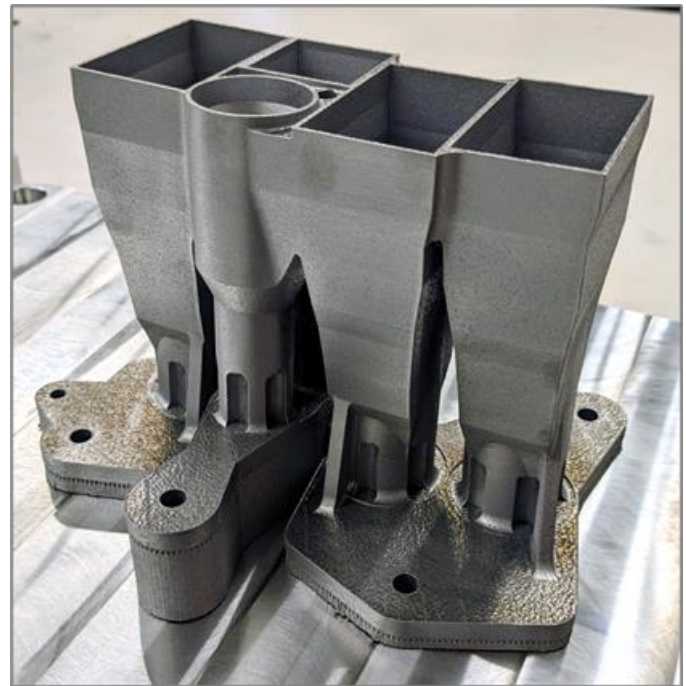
Tri-band feed cluster manufactured using 3-D printing (as manufactured)
